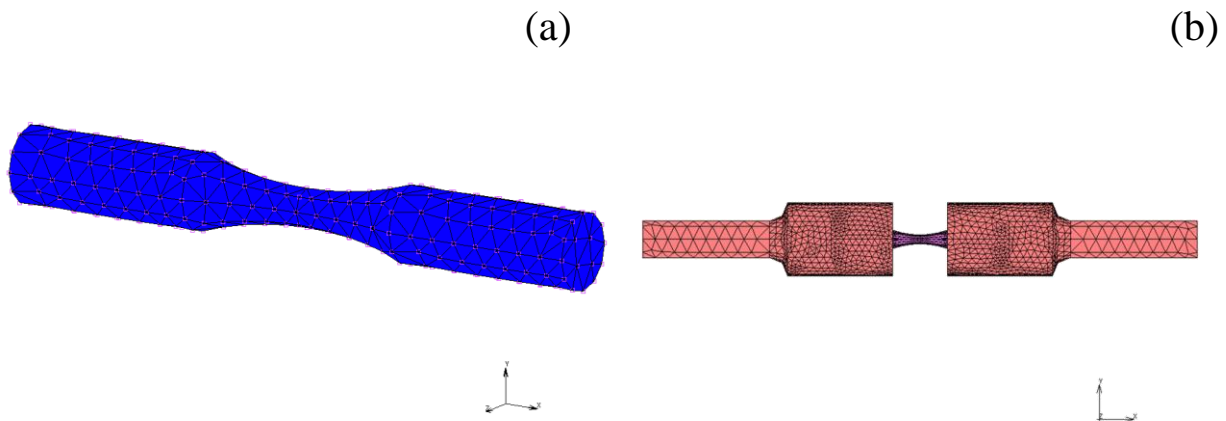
3D SolidWorks models of the HCF specimen and fixture.
